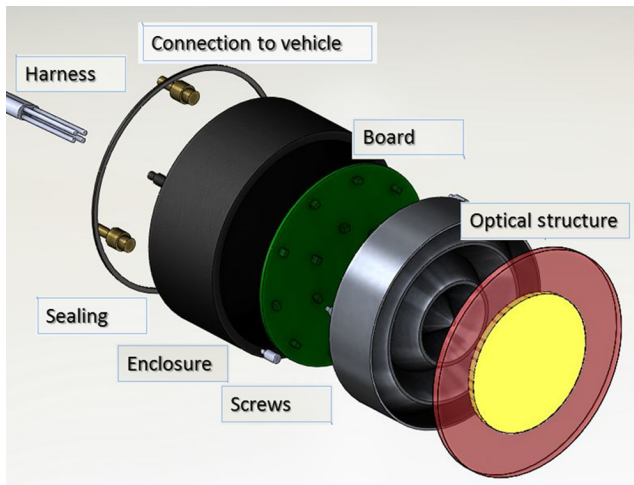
Exploded view of the automotive LED rear lighting concept.
